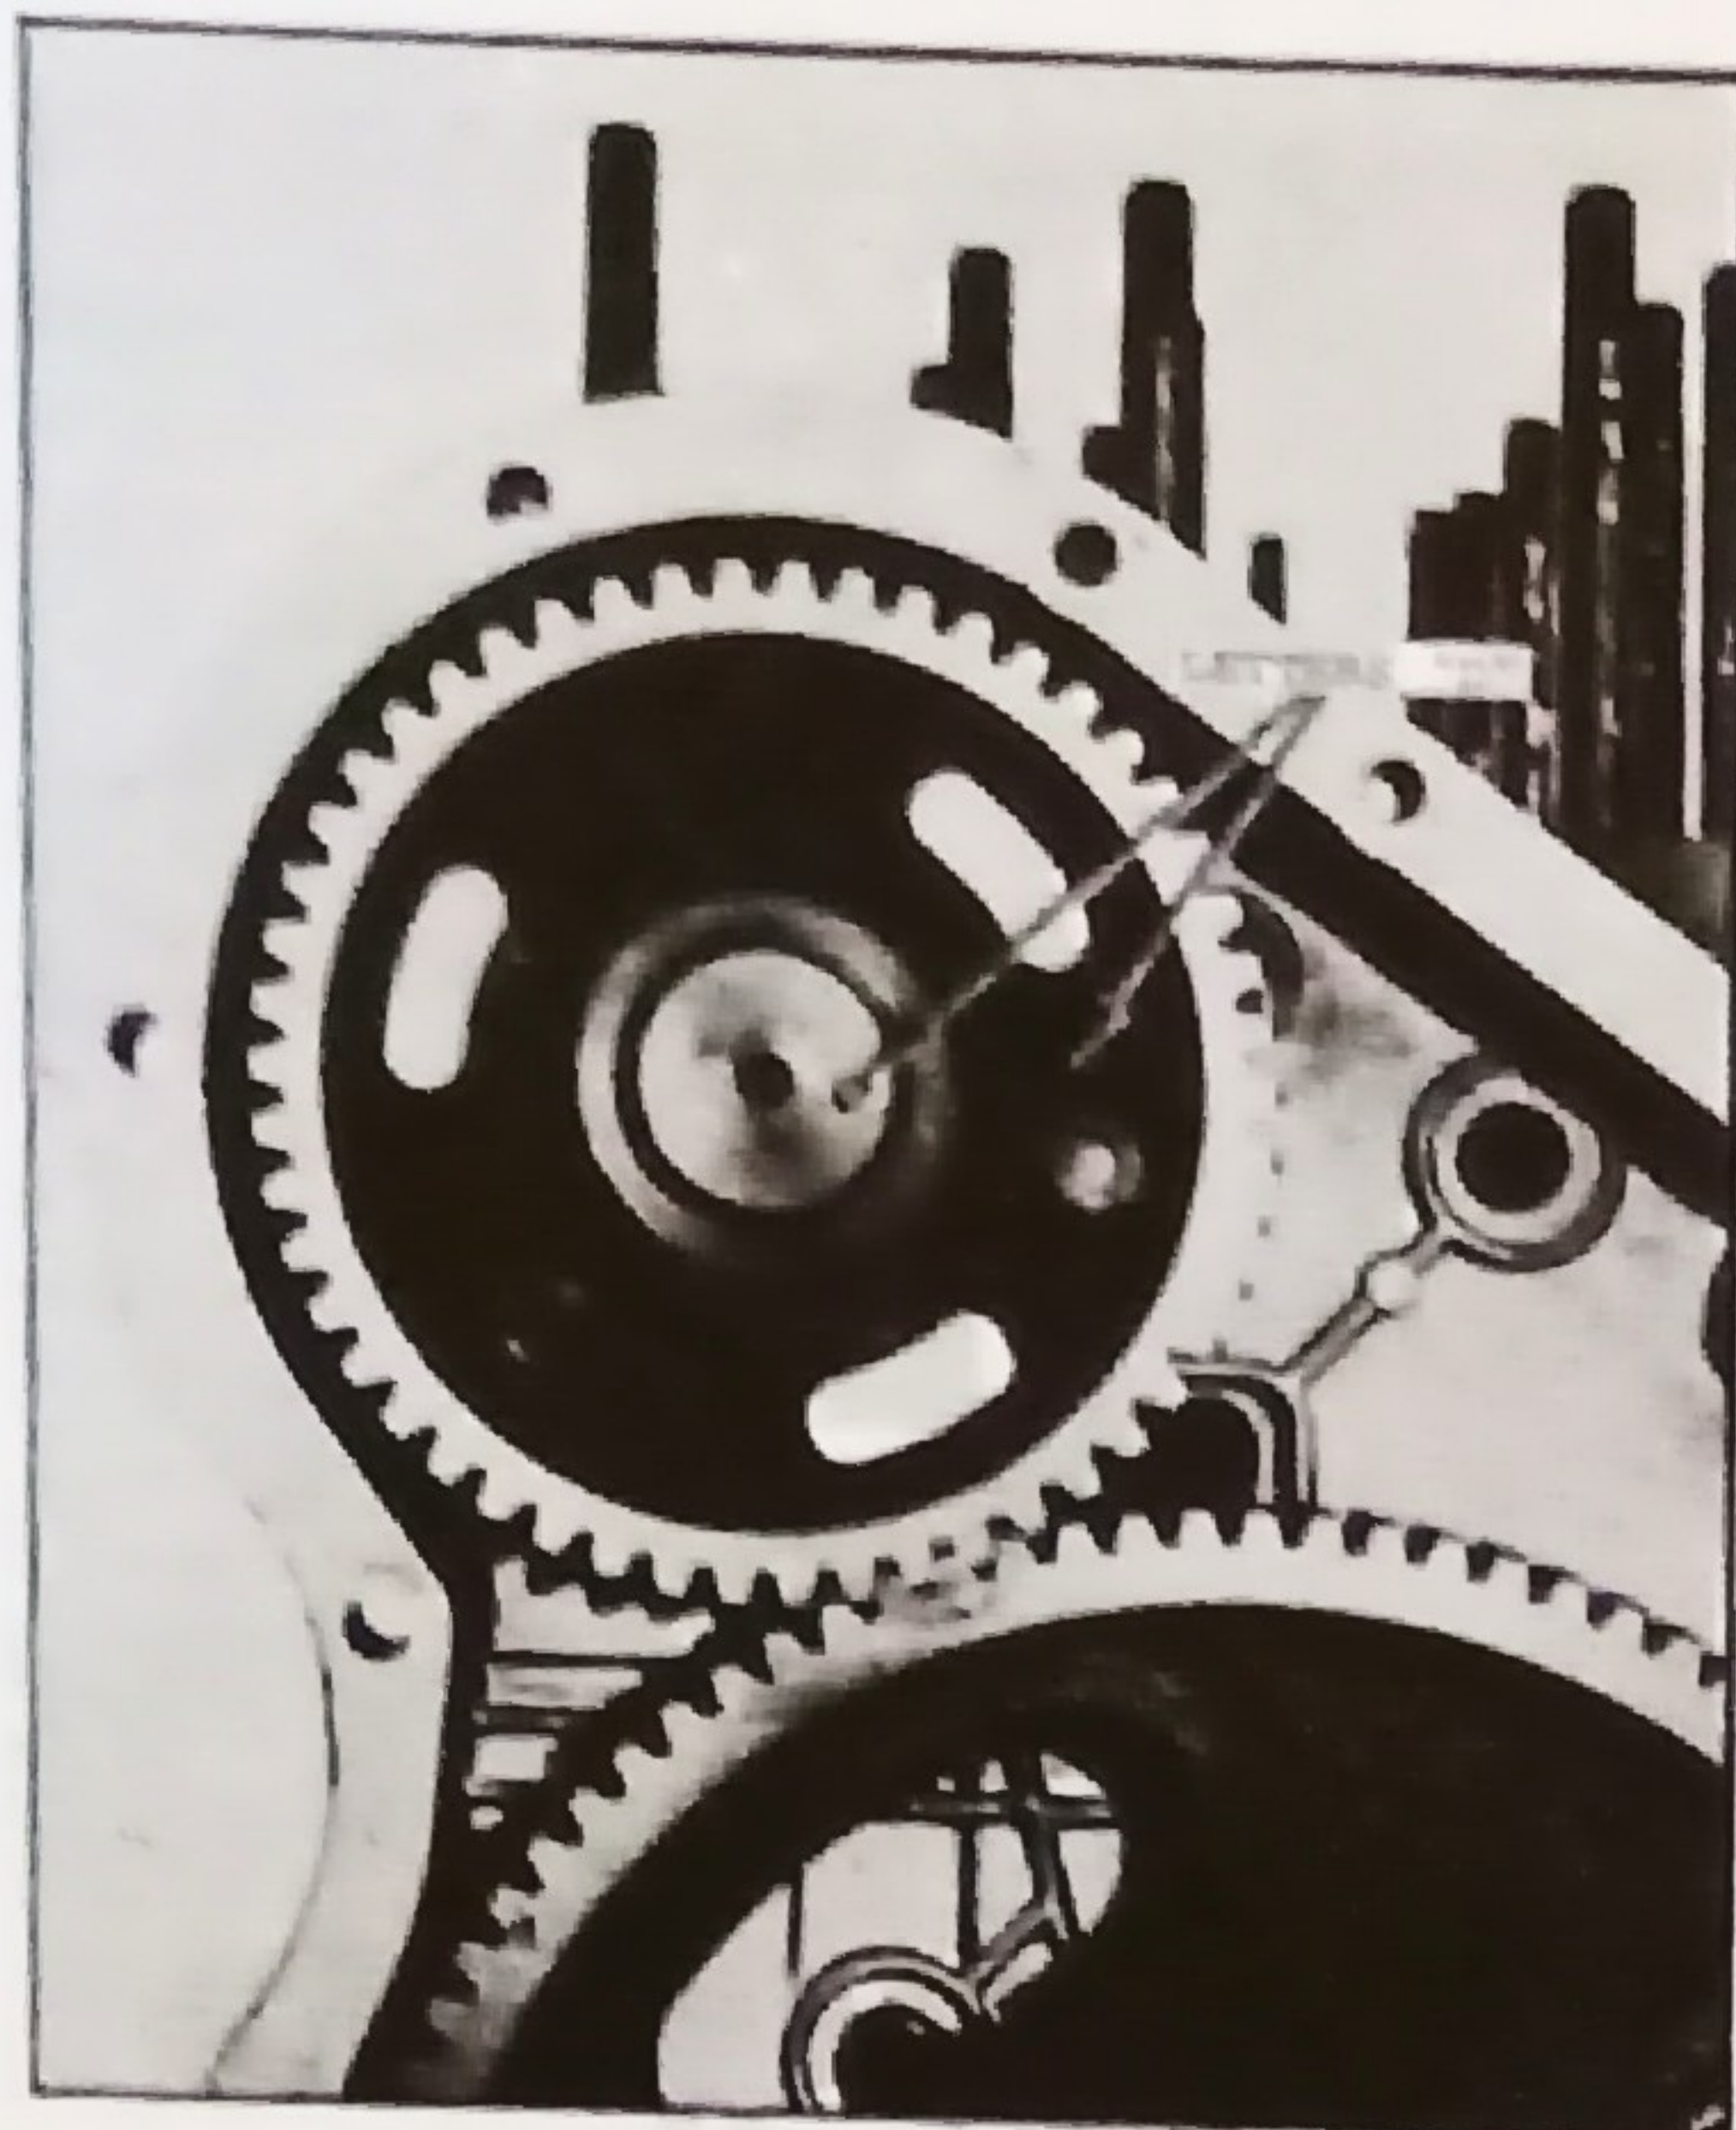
Camshaft and its Gear are Marked with Letters "D" to Indicate Proper Gear Installation
